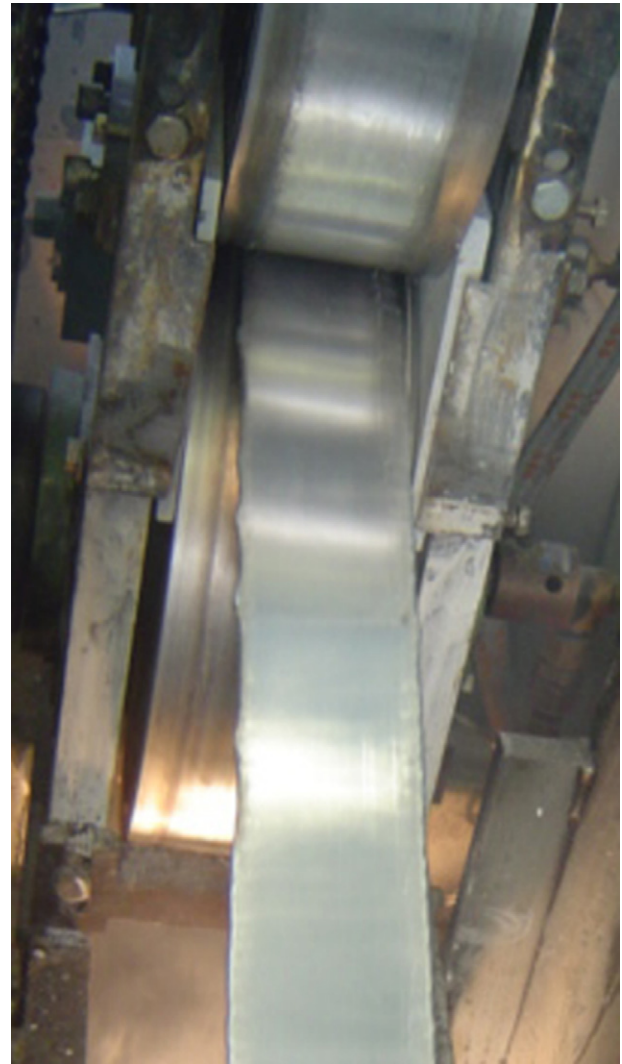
Twin-roll strip test caster at the IME and its geometrical setup: caster and cast strip.
